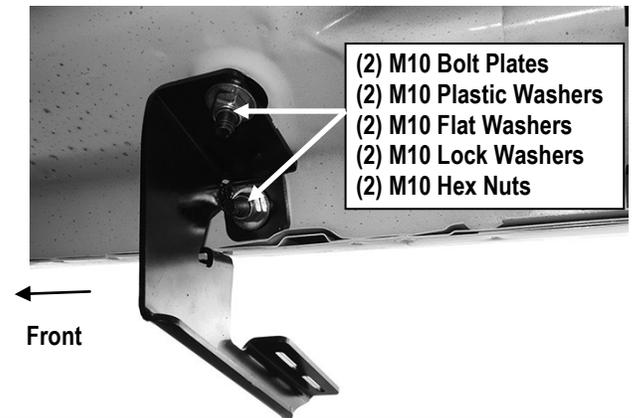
Passenger Side Front & Center Mounting Bracket Locations
